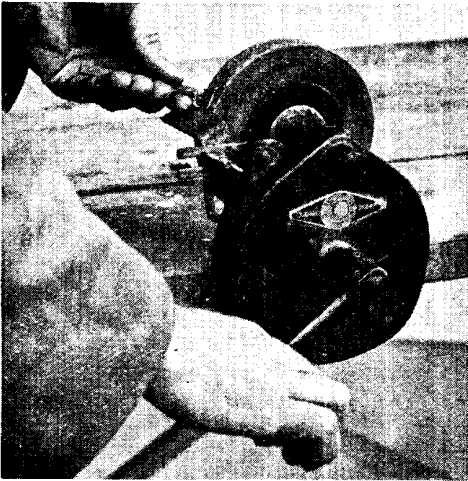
An emery wheel on a bench grinder is shown in use grinding a swan-neck lathe tool
